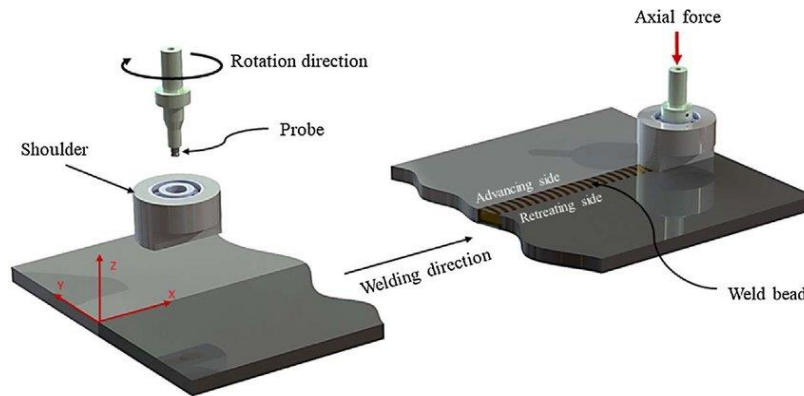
Stationary Shoulder Friction Stir Welding (SSFSW)
